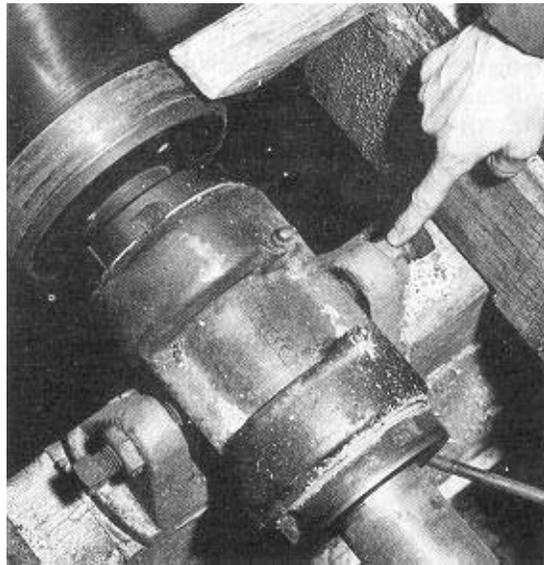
Adjust set screws on the saddle of one of the outboard arbor bearings to give the desired lead. Loosen lock nuts before making lead adjustment, and be sure to re-tighten lock nuts after adjustment is completed.
